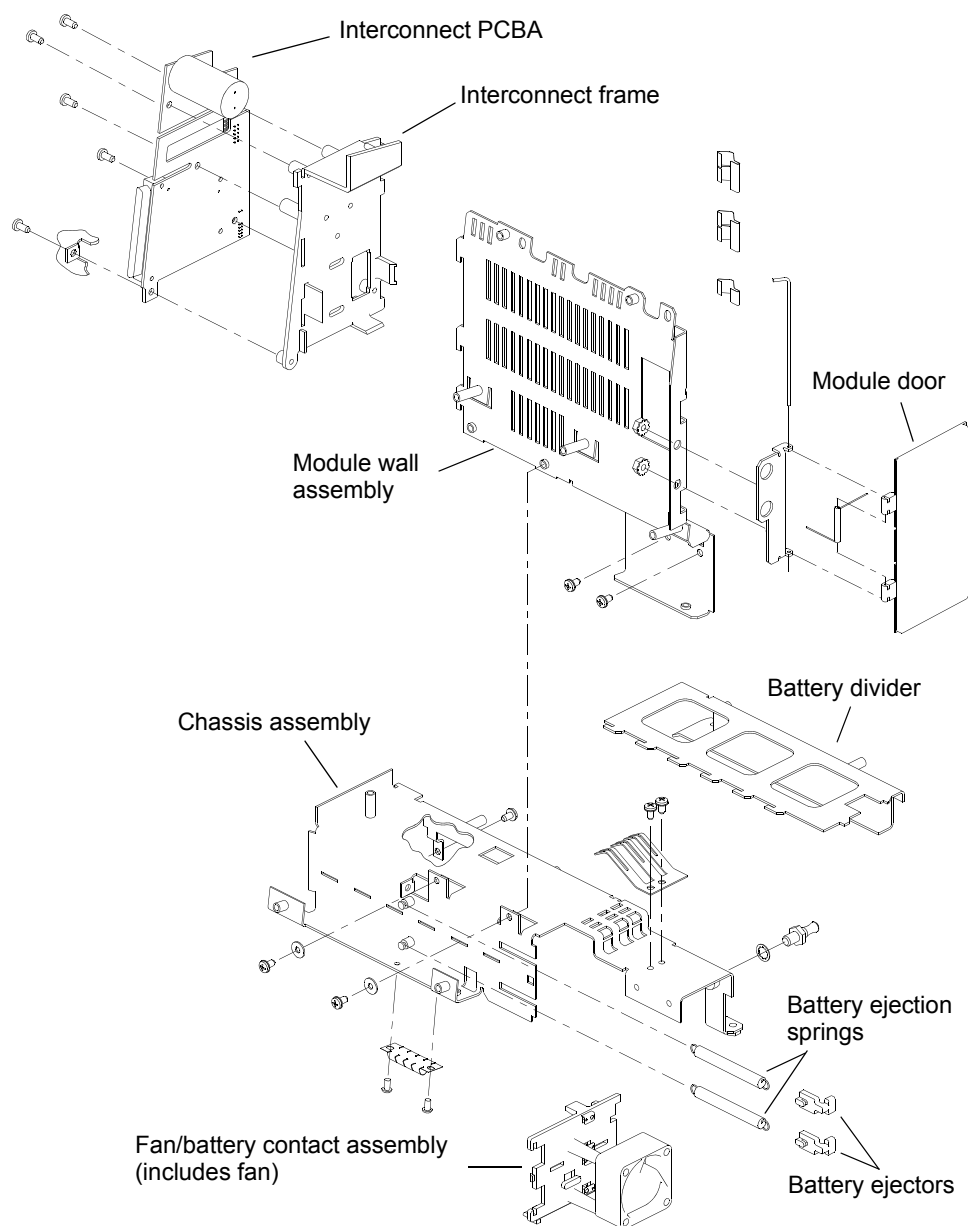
Replacing the fan/battery contact assembly and Interconnect PCBA
